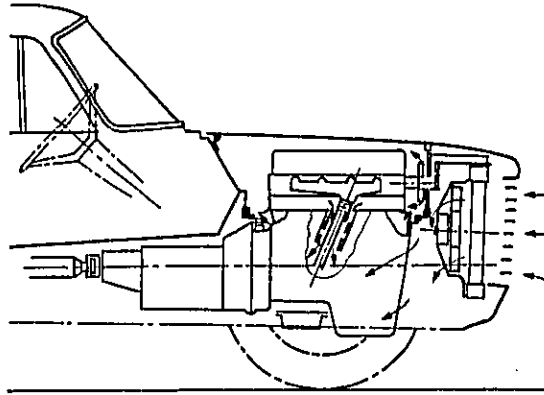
Design concept of a quiet passenger car based on the new engine type
